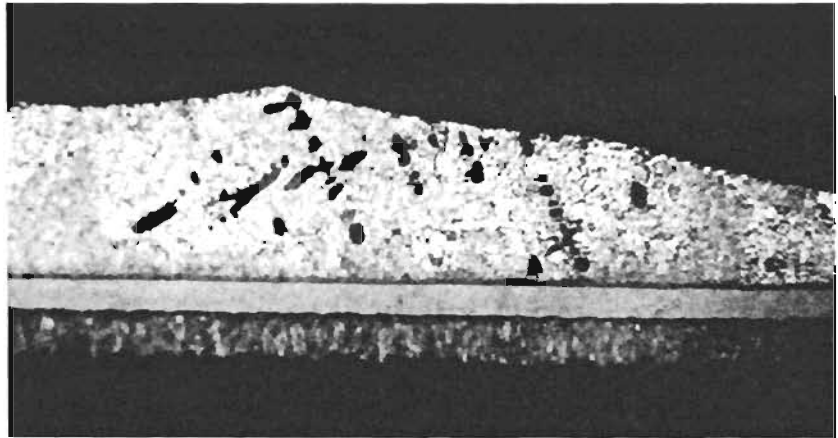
Cross-section of an assembly track, soldered by SC soldering process (Alpha Metals)
